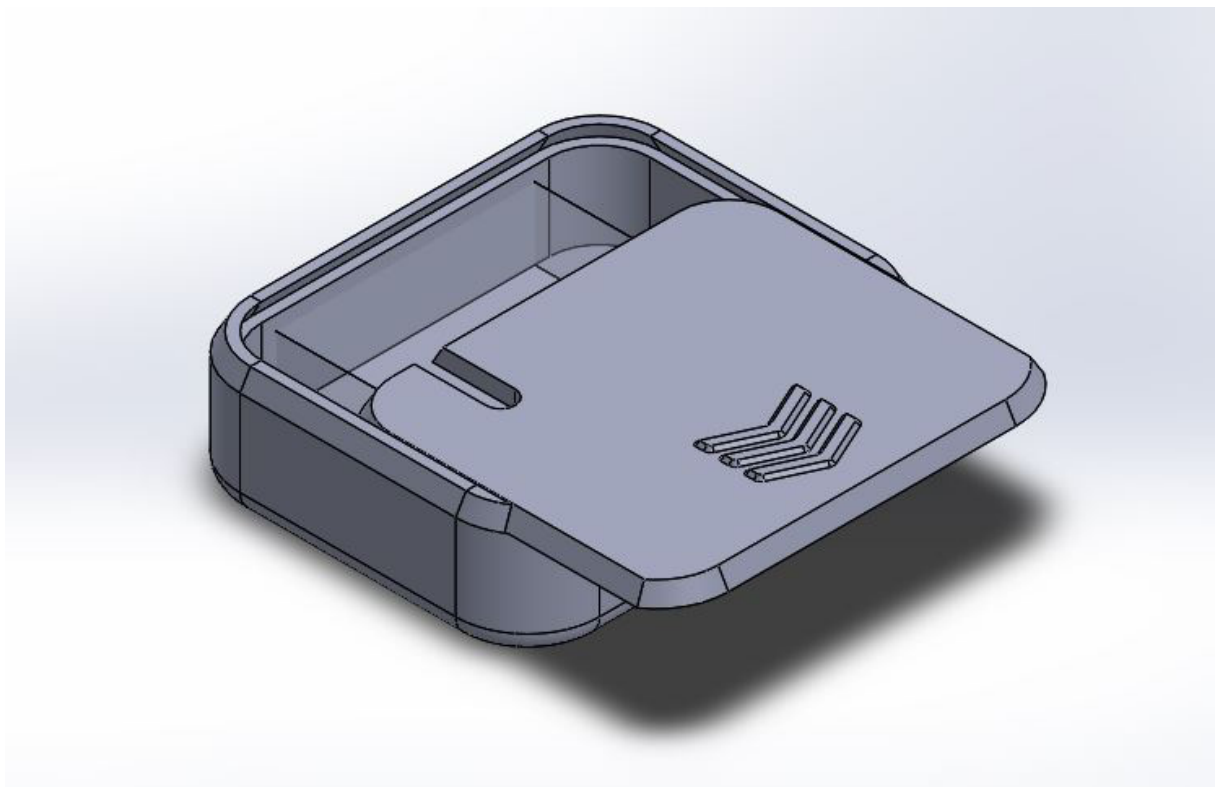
Form exploration of Rectangular Case Design with slider mechanism for the device
